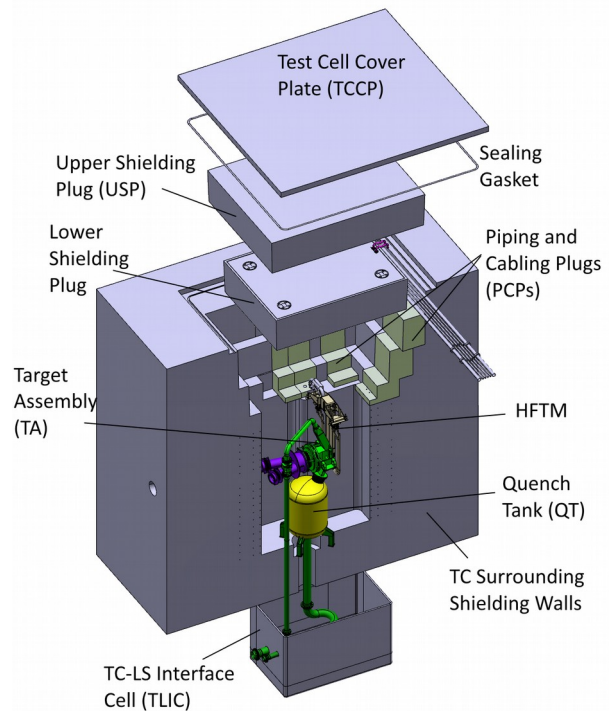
Exploded view of IFMIF-DONES TC reference design with cross section of the TC surrounding wall
